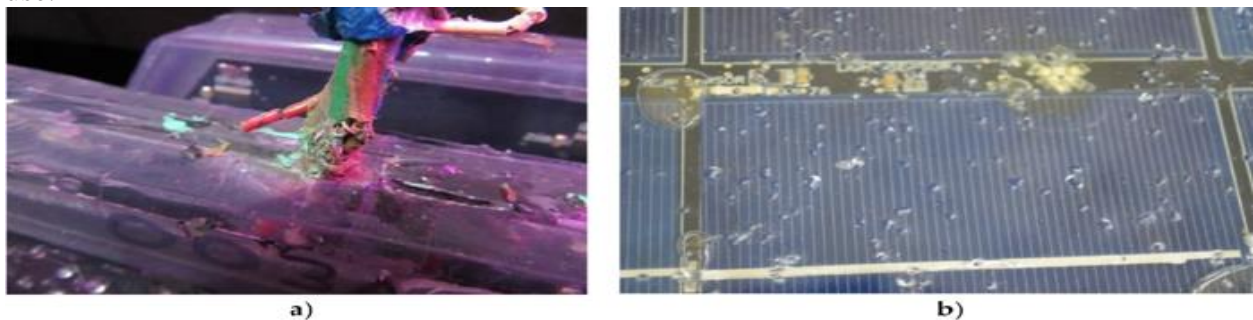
a) Cable damage on the solar panel; b) Manufacturing defects [19]
